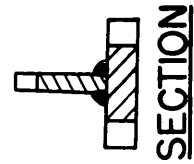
LONGITUDINAL FILLET-WELDED "TEE" SPECIMEN
